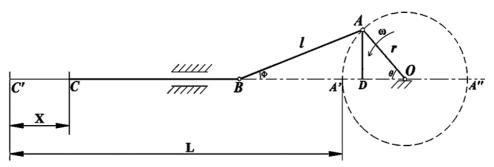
Schematic motion of crank and connecting rod for the cutting mechanism.
